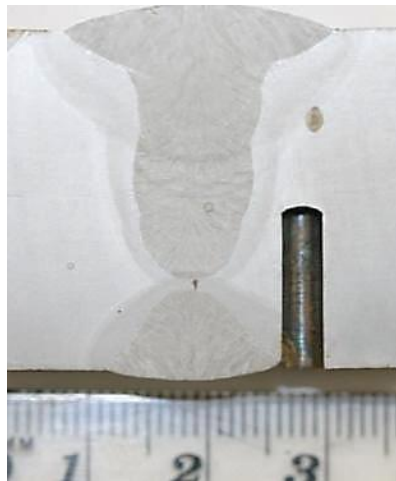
Macrographs of X65 (B) weld 3
